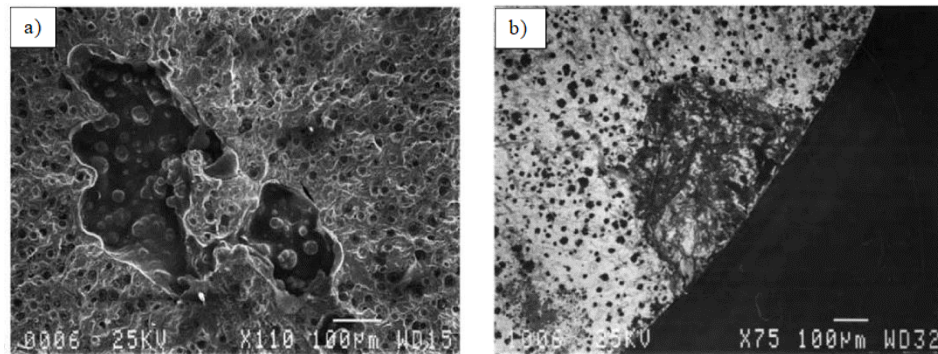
SEM of fracture surface showing casting defects, (a) internal shrinkage and (b) oxides at surface [42].
